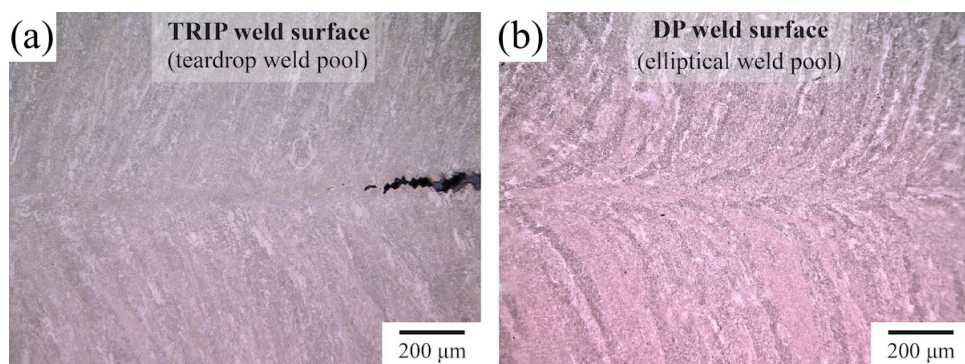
Macrographs of the weld surface. (a) TRIP steel and (b) DP steel.
